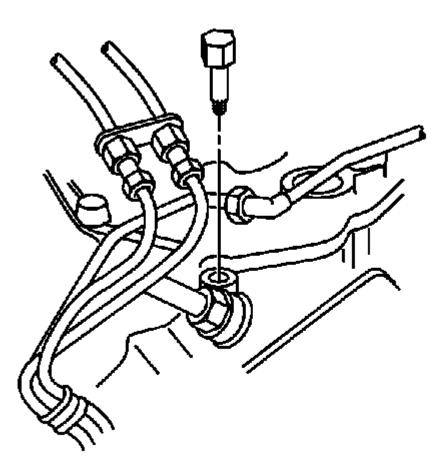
View Of Fuel Pump/Oil Pressure Sensor Fitting Courtesy of GENERAL MOTORS CORP.
